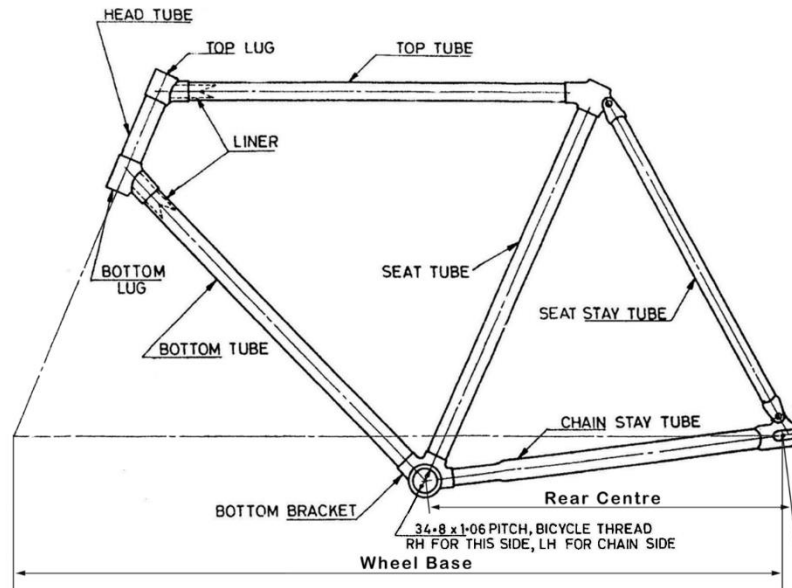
STANDARD FRAME WITH THREADED BOTTOM BRACKET SHELL
